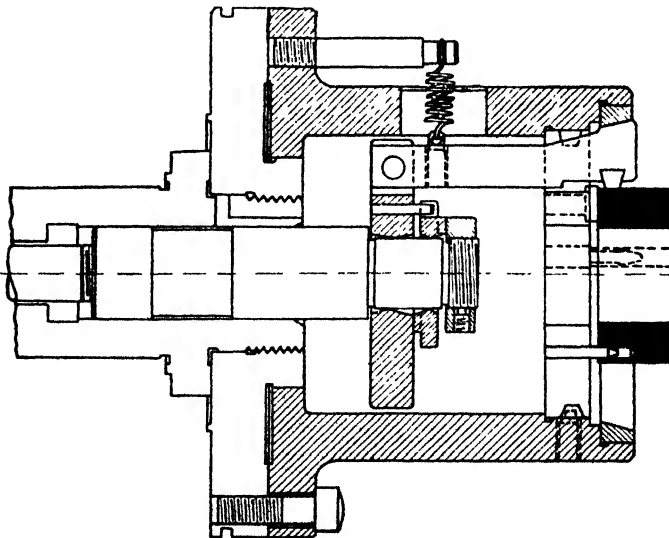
Details of chuck or holding fixture and the dowel pin which locates the work.
